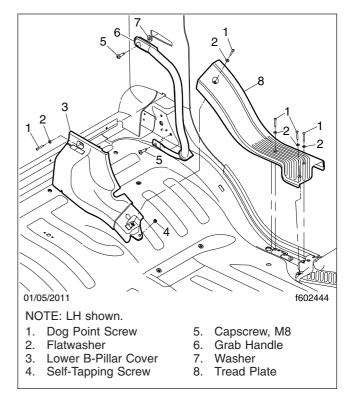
, Tread Plate and Lower B-Pillar Cover Installation
